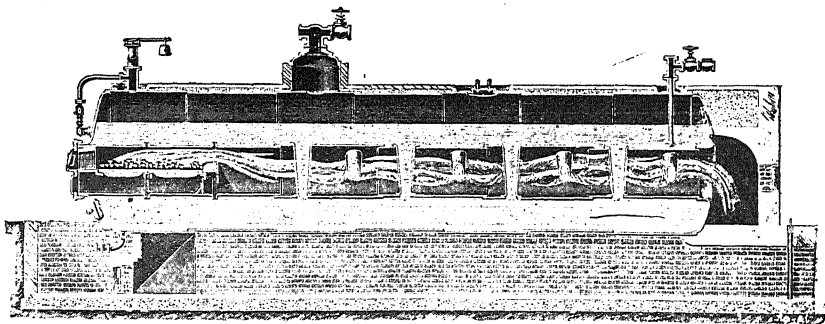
Boiler with two interior cylindrical furnaces with Galloway tubes in the furnaces.
